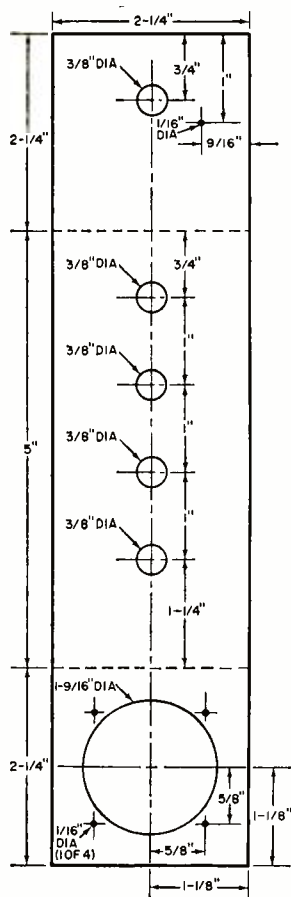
Type of box used and layout are not critical, but make the four bolt holes for the meter a bit oversized to permit rotating the meter if necessary to keep it straight. If you have enough room on your transmitter, you can mount all the parts directly on it, and thus do away with the cable and the box.
